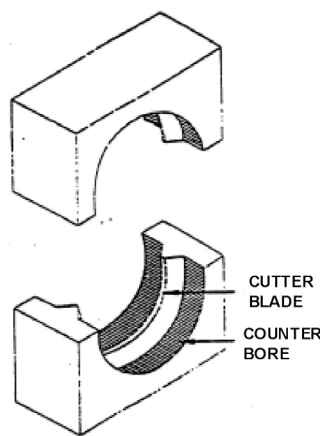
SPLIT BLADE WIRE STRIPPER DESIGN
